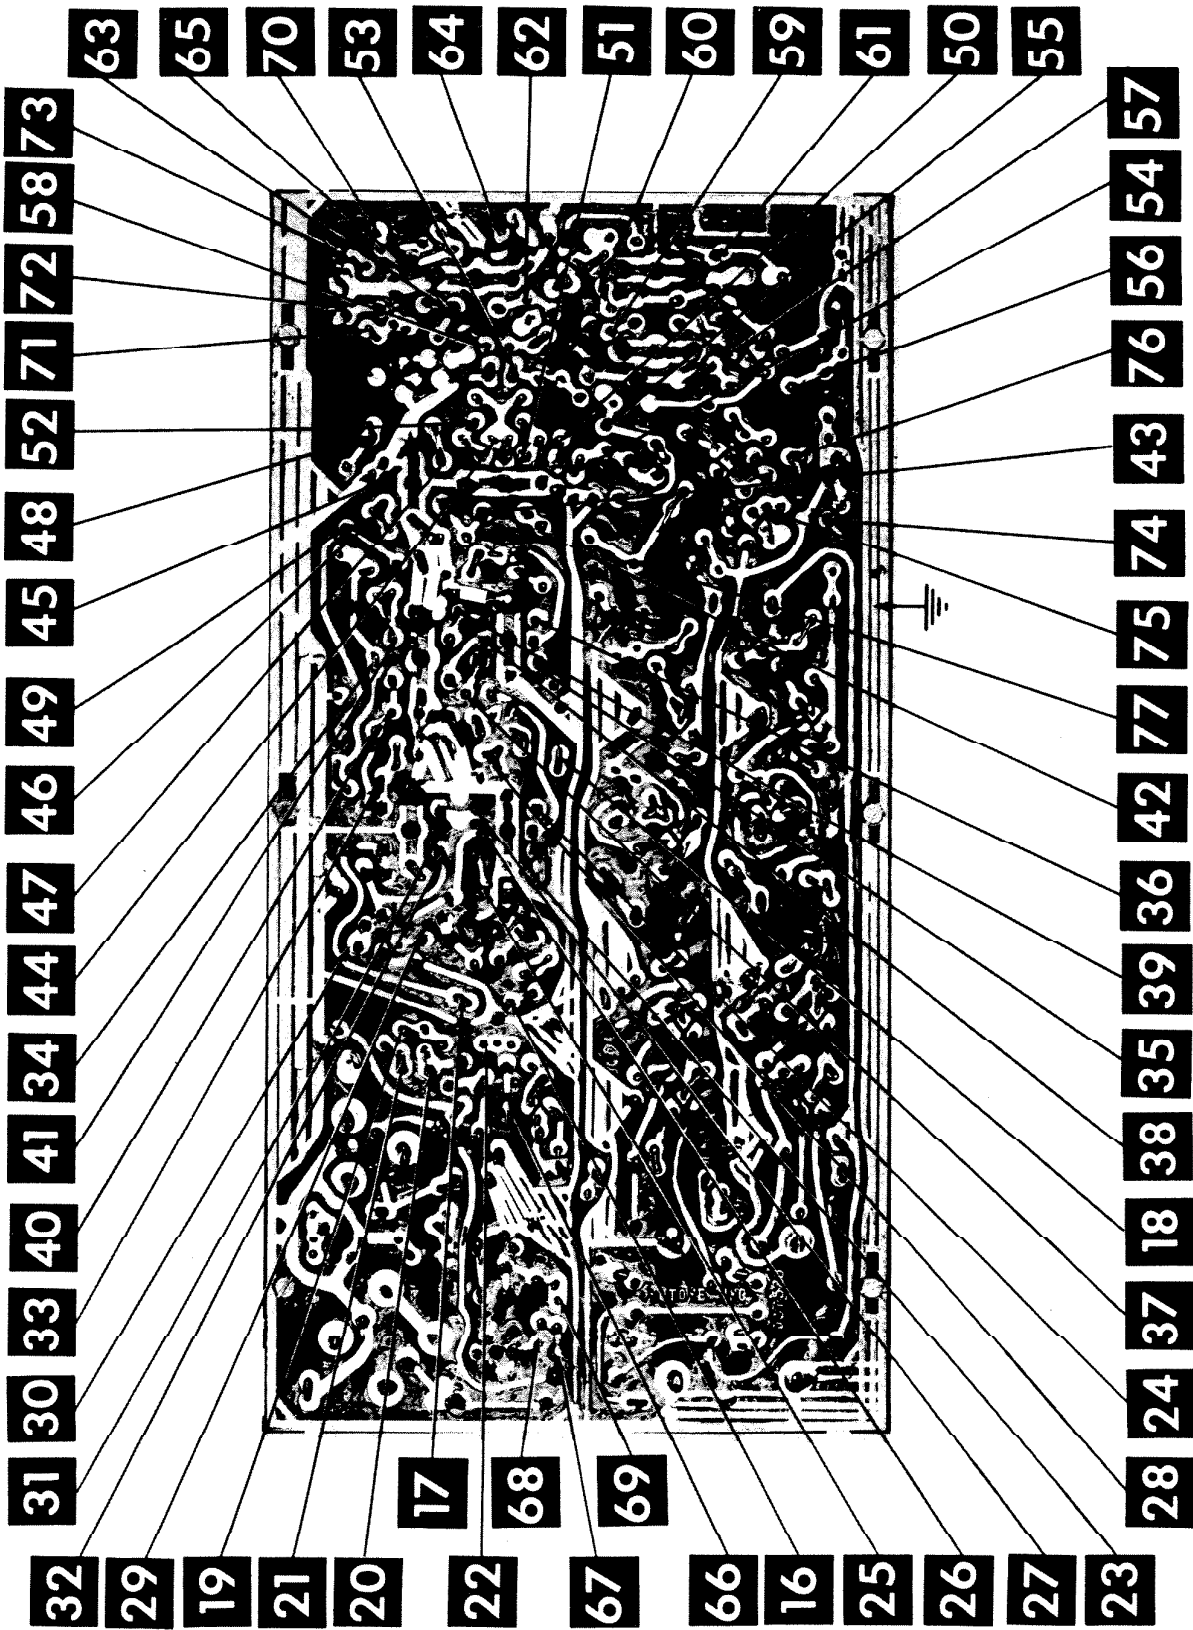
Bottom view of receiver printed board—CircuiTrace points.
